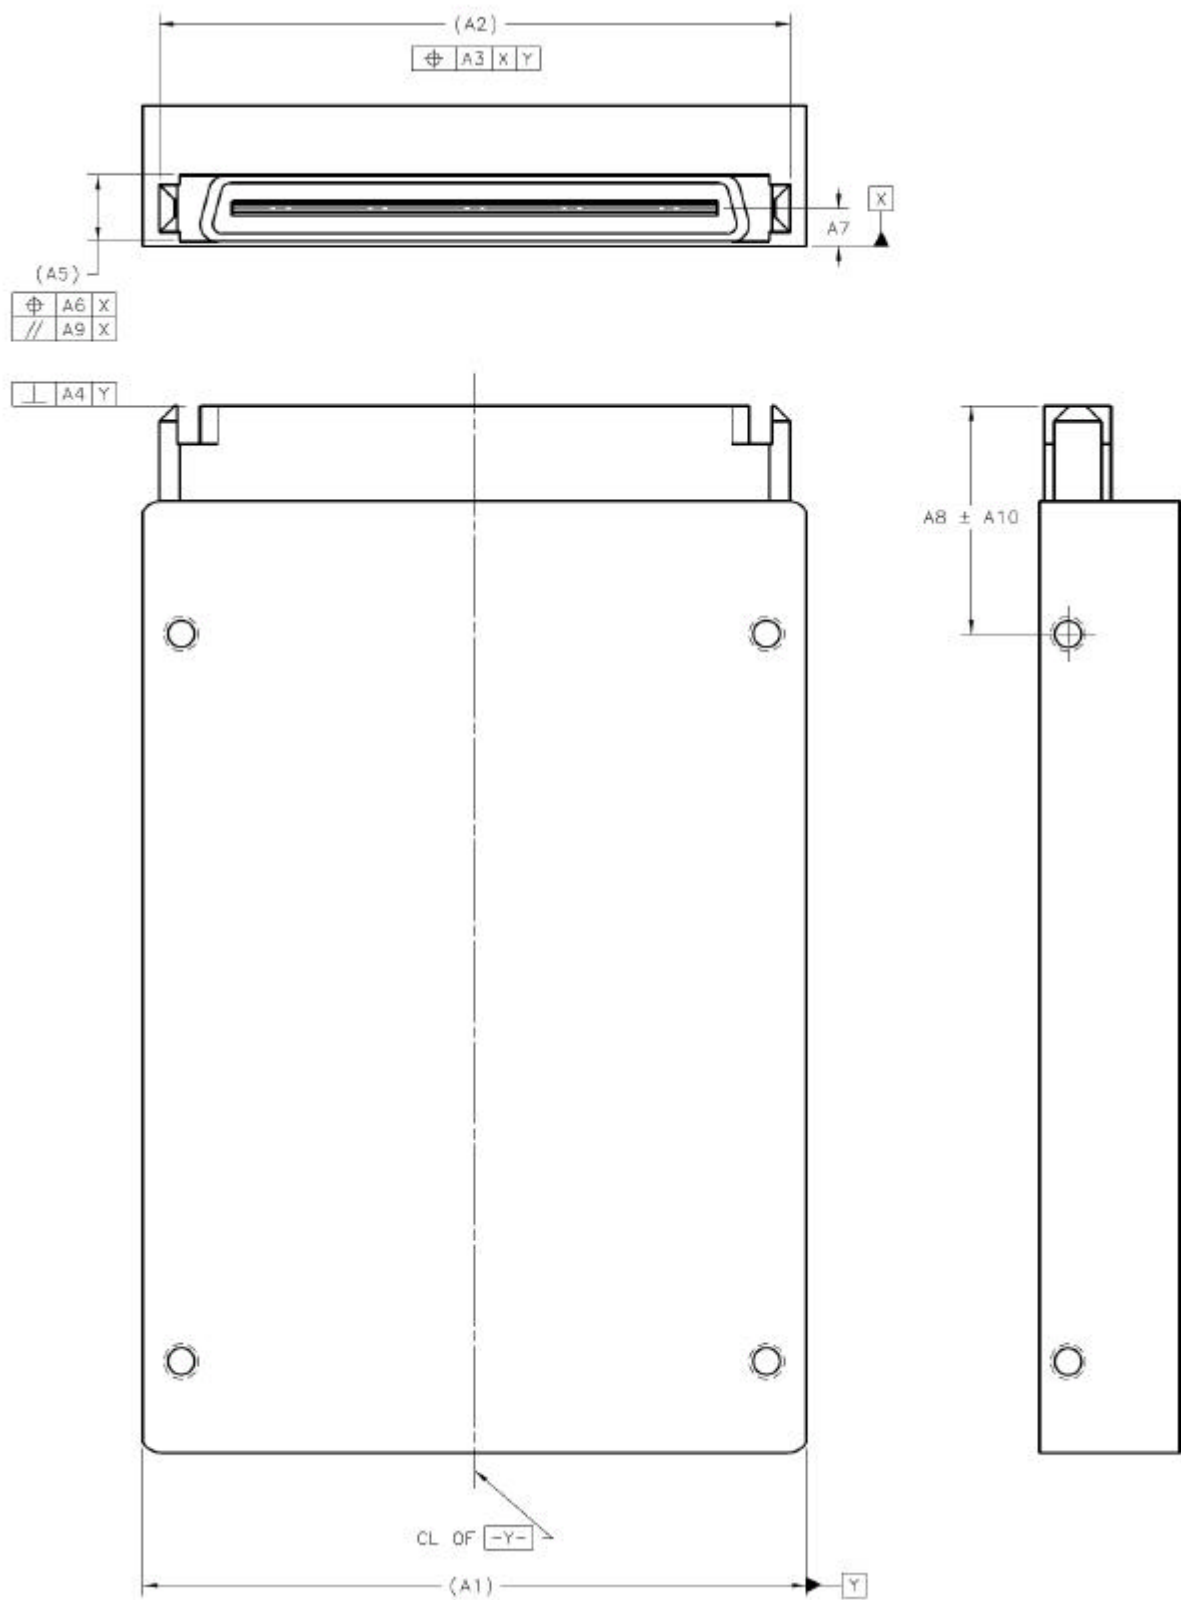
(OPTION 2) SCA-2 Connector Referenced To Side Mounting Screw On 63.5 mm (2.5") Disk Drive
